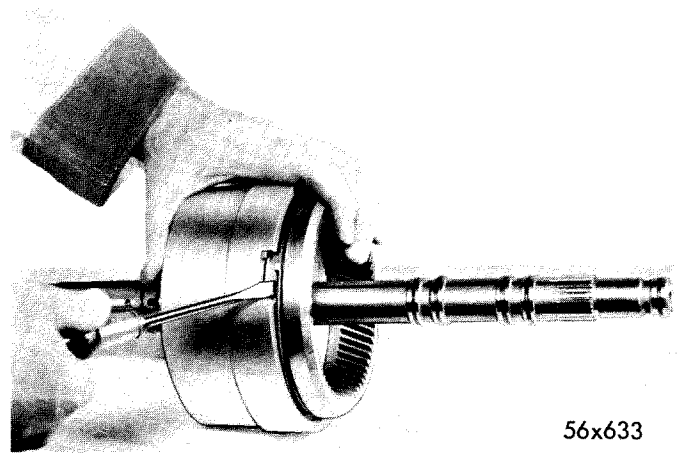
Removal and Installation of Output Shaft Drive Housing Snap Ring
